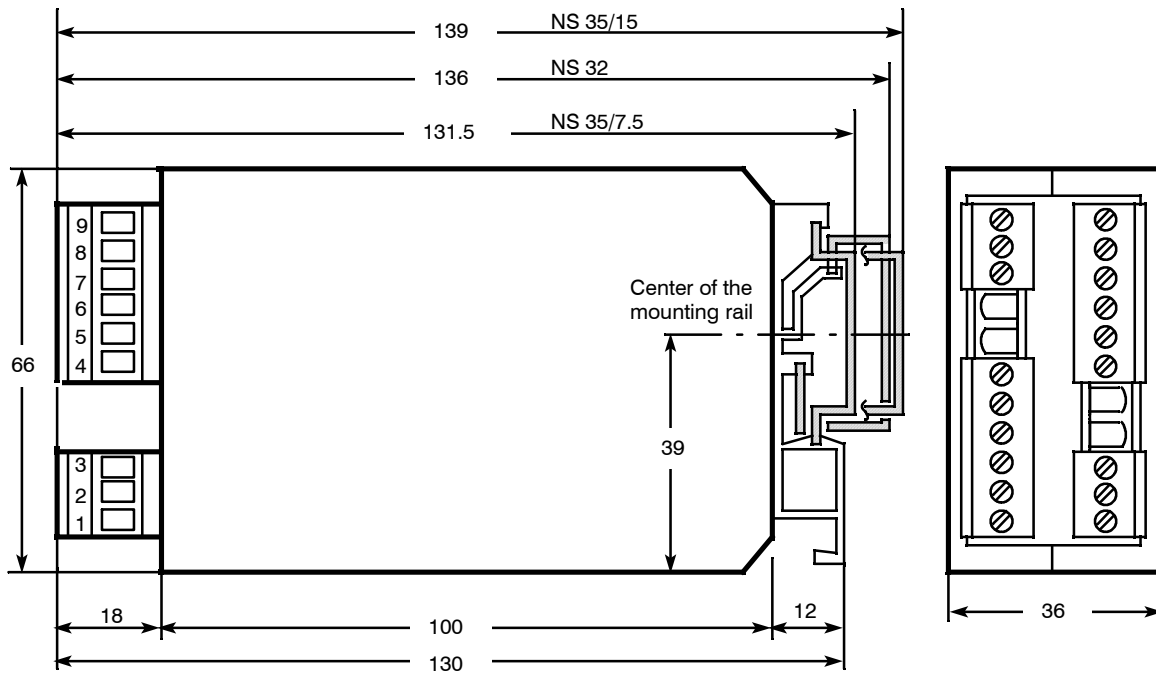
Dimensioned drawing coupling relay, dimensions in mm
